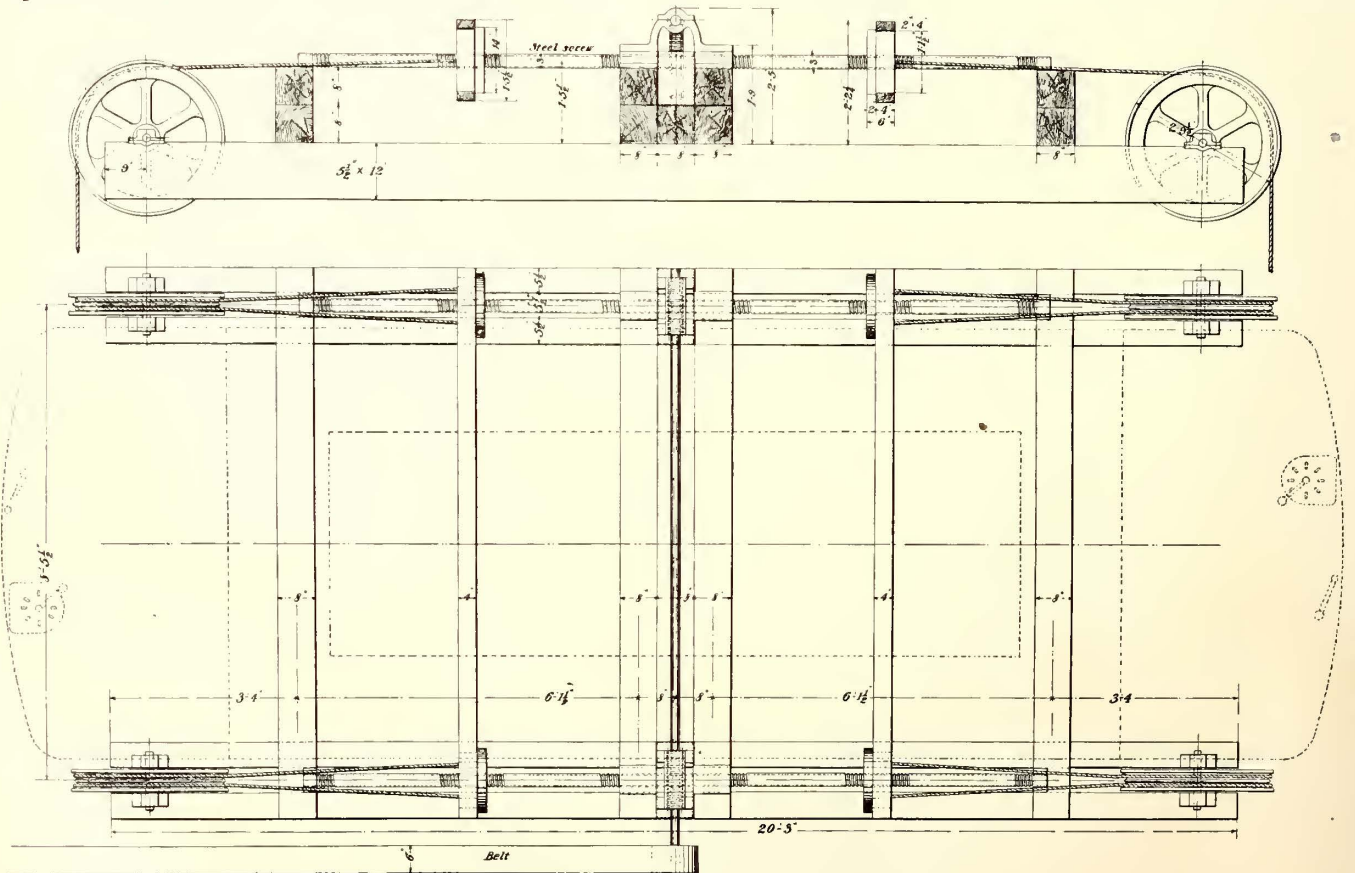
PLAN AND ELEVATION OF CAR HOIST
